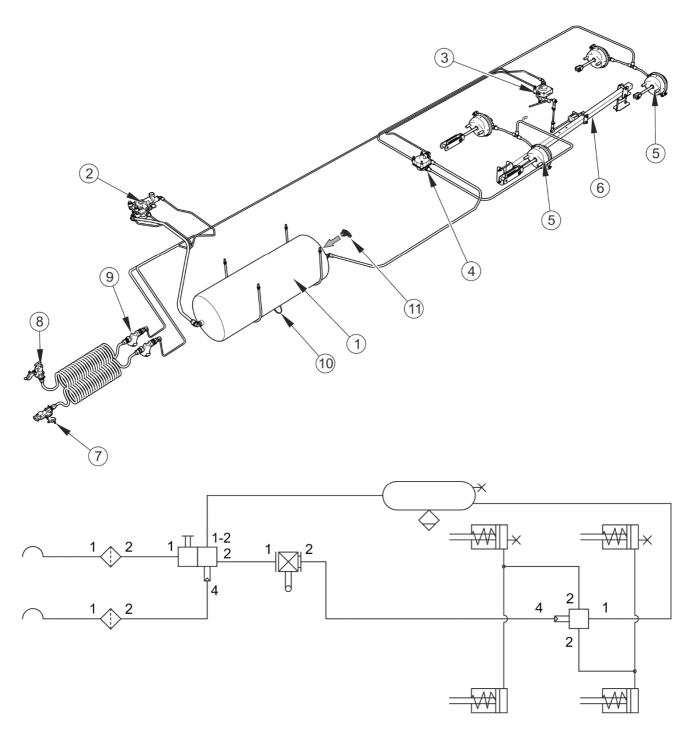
Design and diagram of double conduit pneumatic braking system with ALB regulator
